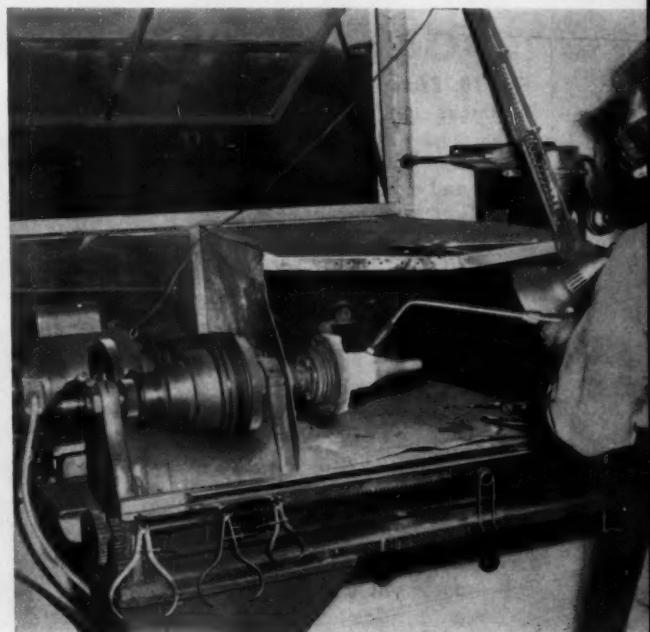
Hot flowing the sprayed-on, hard-faced coating of a glass-mold plunger at Metro Glass Division.
